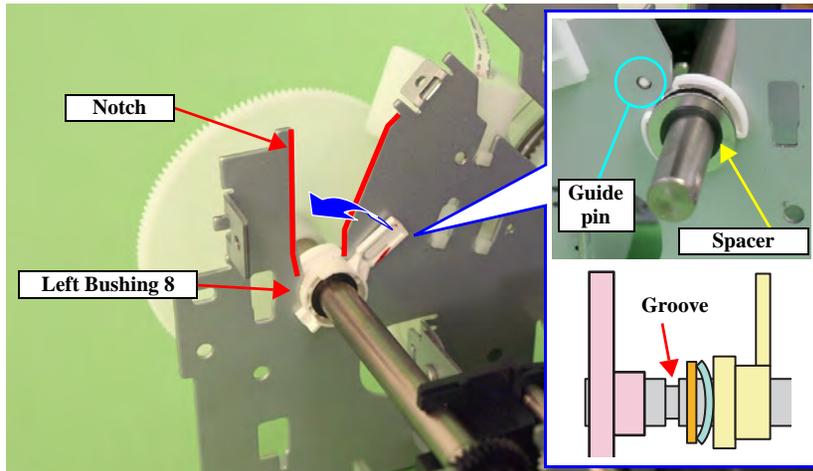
Removing the Spacer and Rotating the Left Bushing 8
